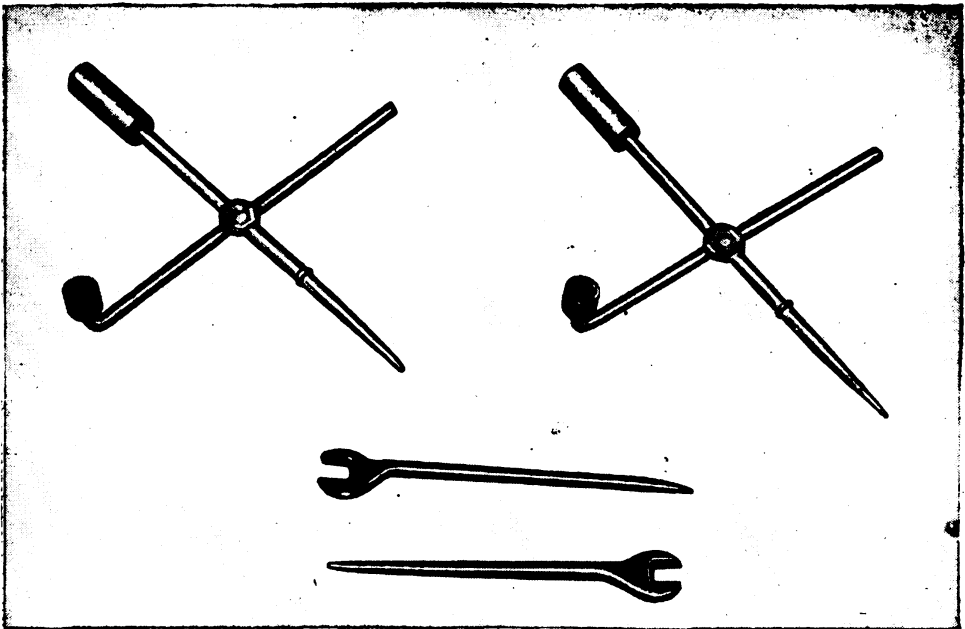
Assembly wrenches, M3 demolition snake.
